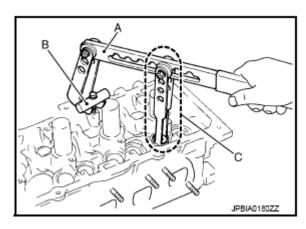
Compressing Valve Spring Using Valve Spring Compressor Courtesy of NISSAN NORTH AMERICA, INC.
